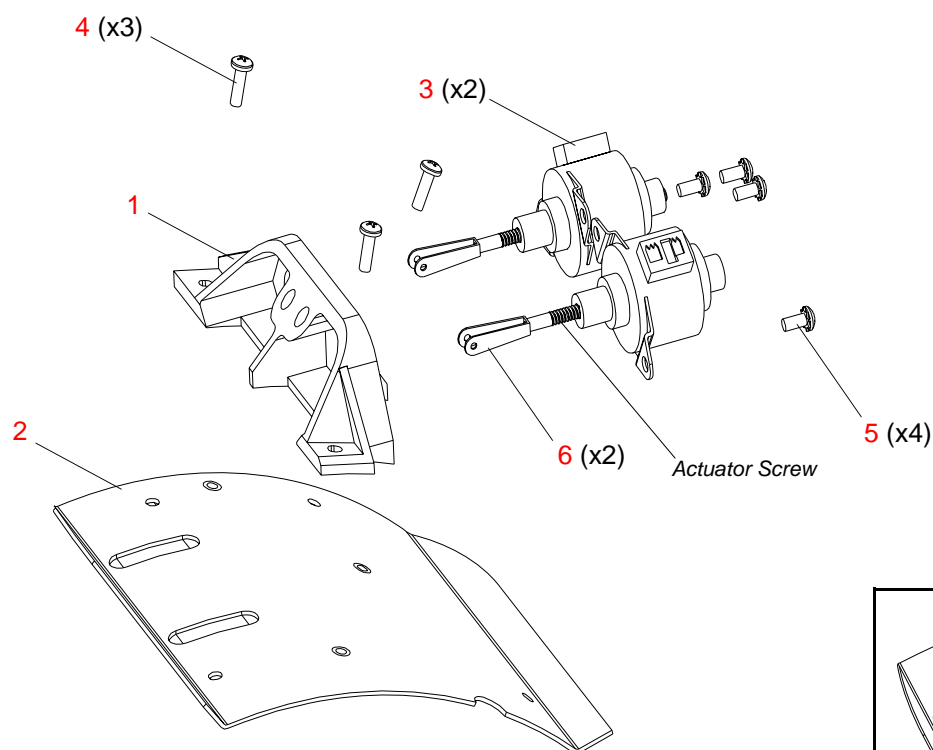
Magenta/Blue Color Motor Assembly
